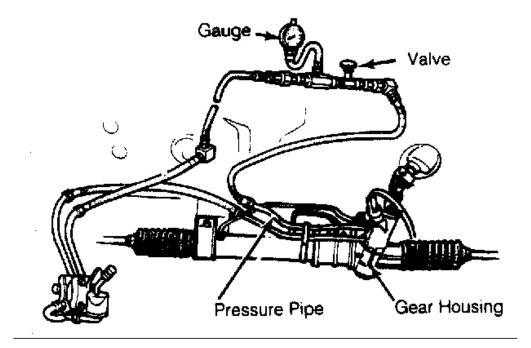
Connecting Pressure Gauge (Except 4-Wheel Steering) Courtesy of MAZDA MOTORS CORP.
